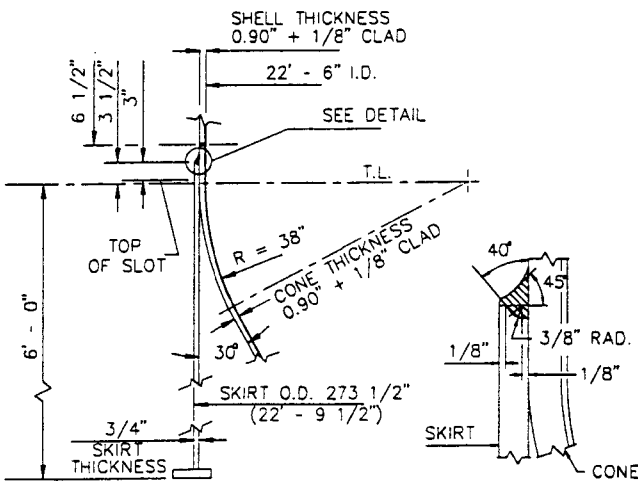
Coke Drum Skirt Attachment to Outside of the Shell
